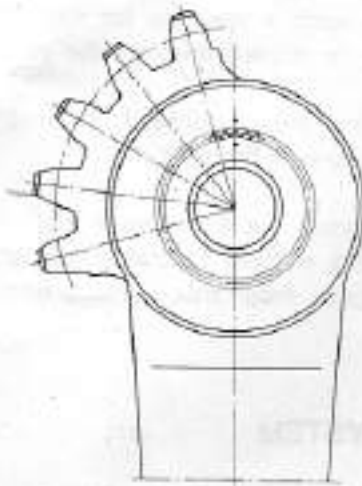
Steering gear drop arm hub positioning in relation to the main shaft
